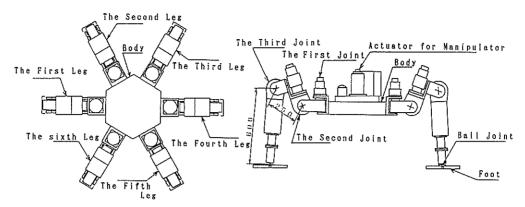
Principal Dimensional Shape of the Aquarobot 1
